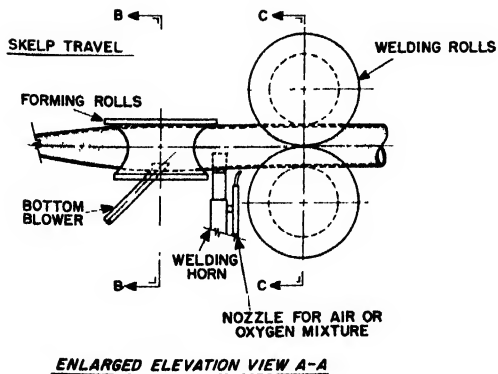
Diagram depicting schematically the operations performed in a continuous forming and welding mill.
